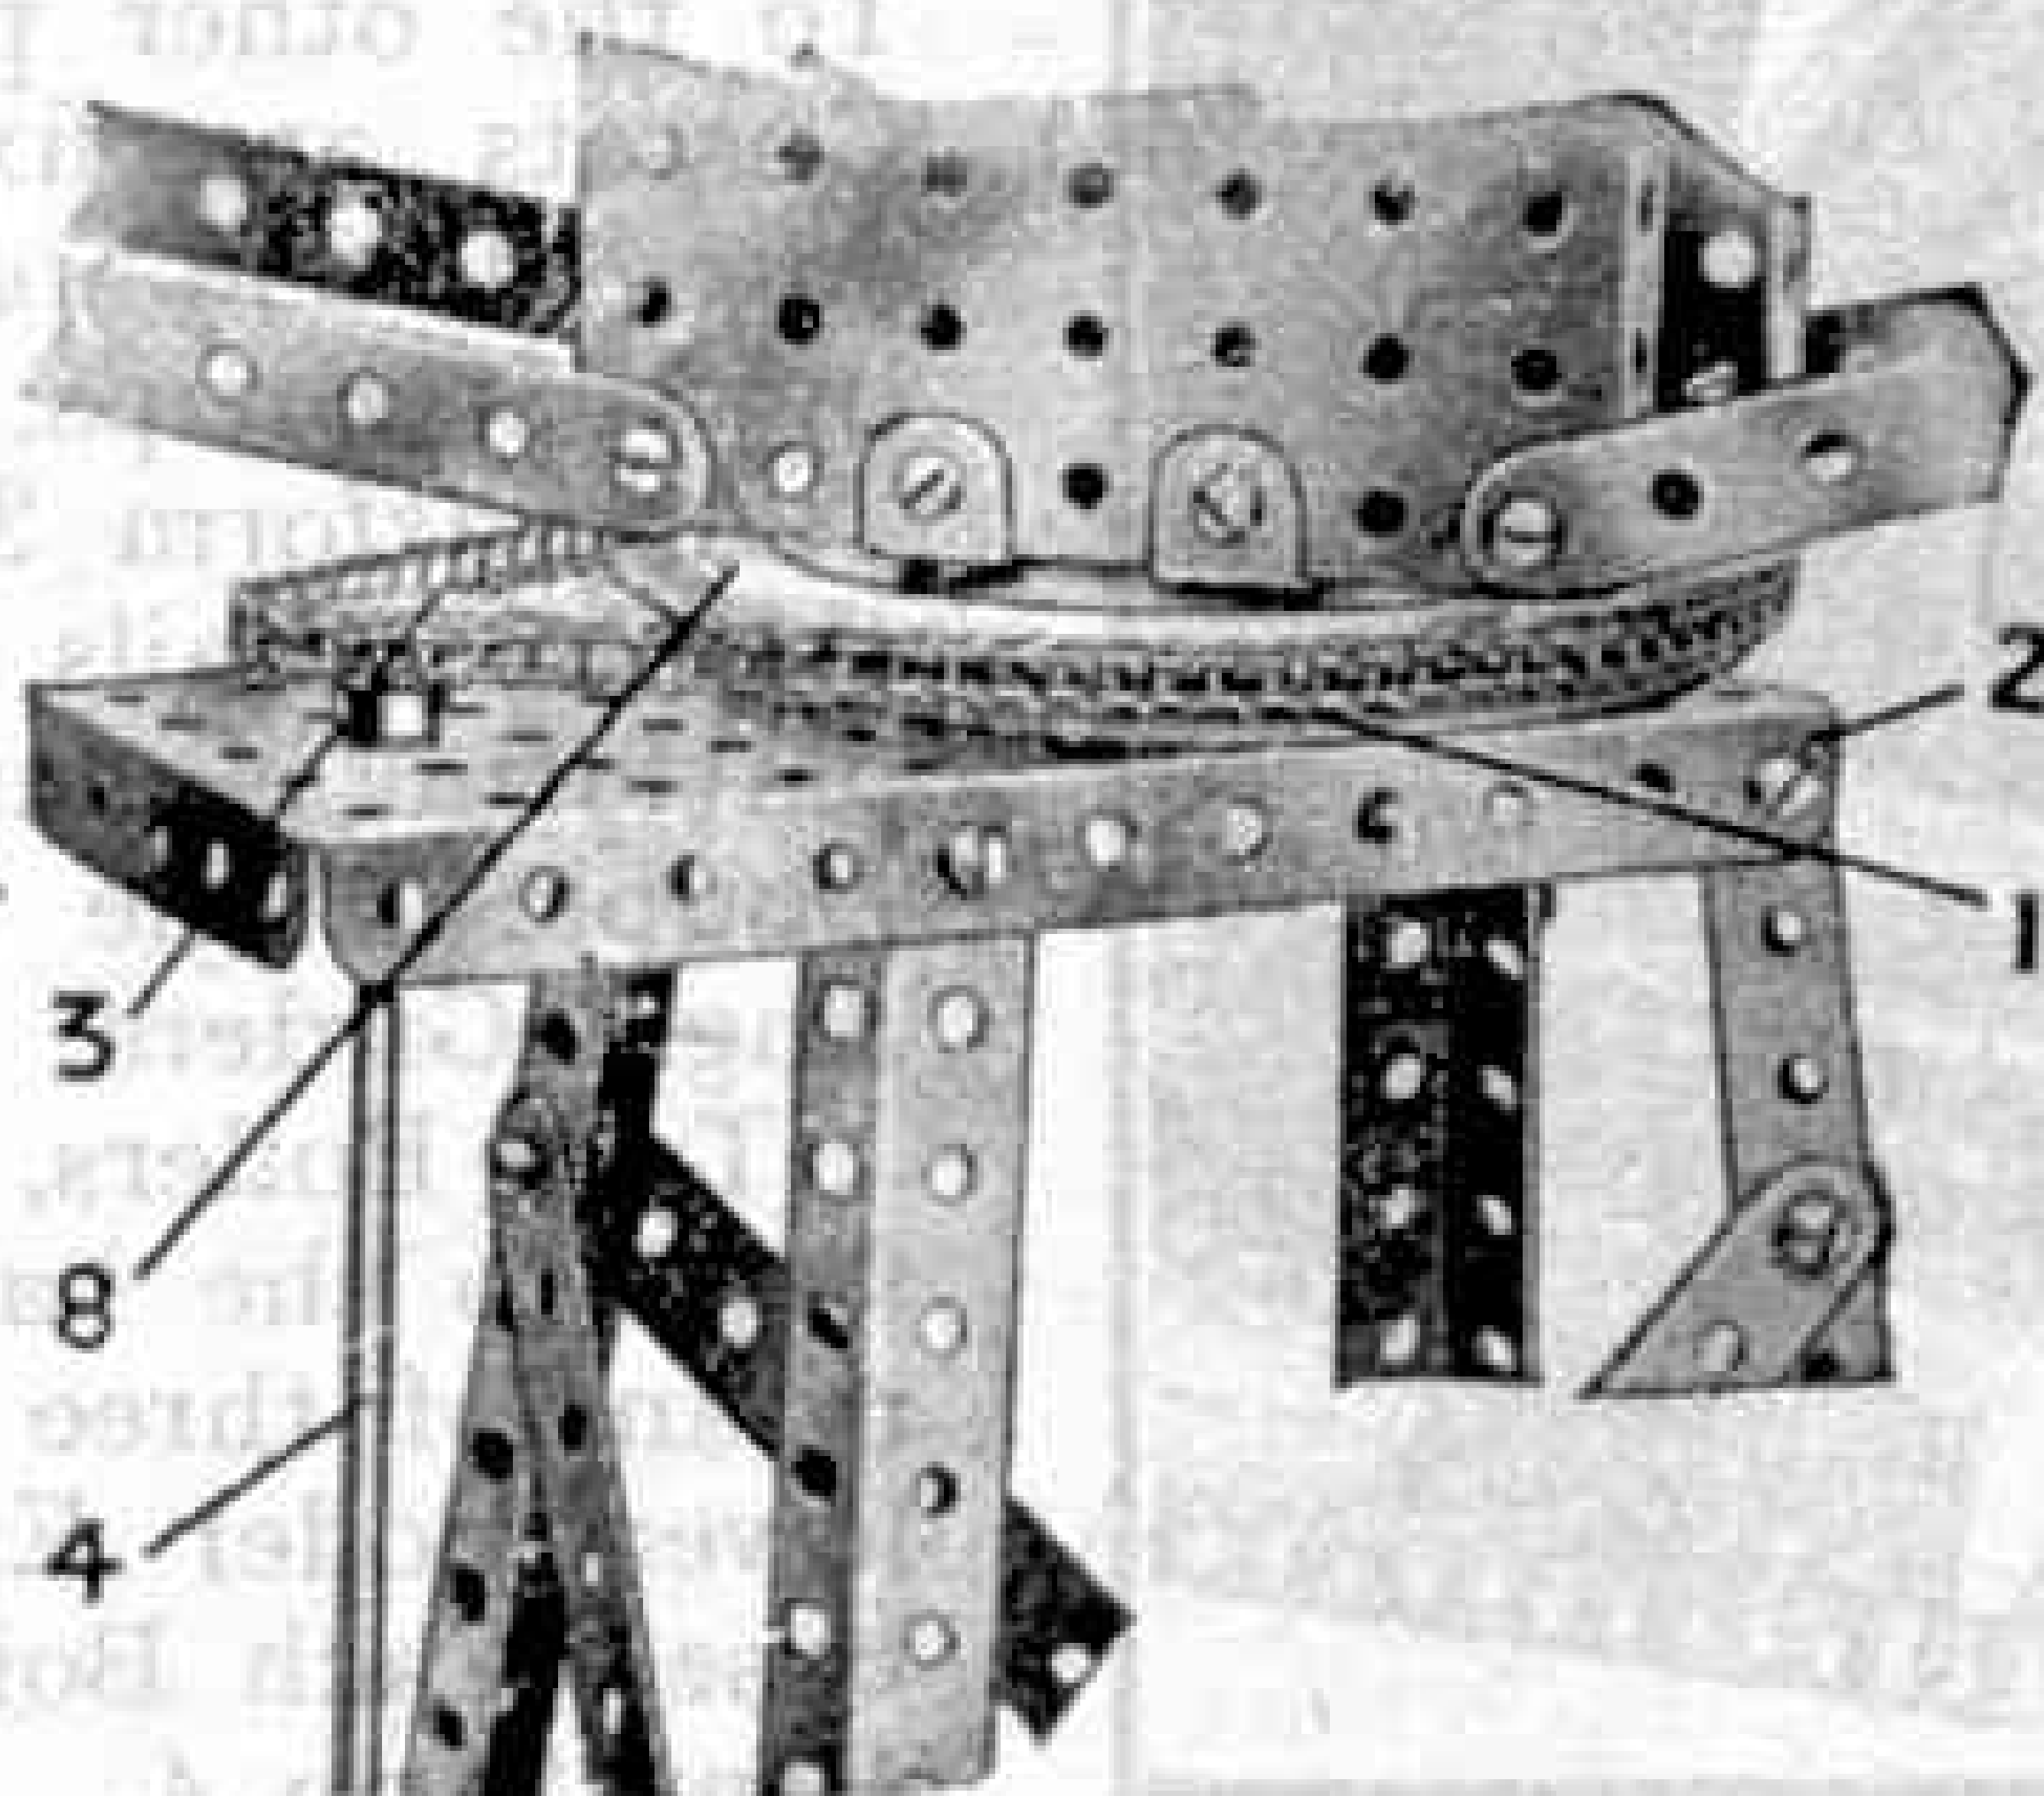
A method of mounting the Ball Bearing for carrying the jib of a crane.
